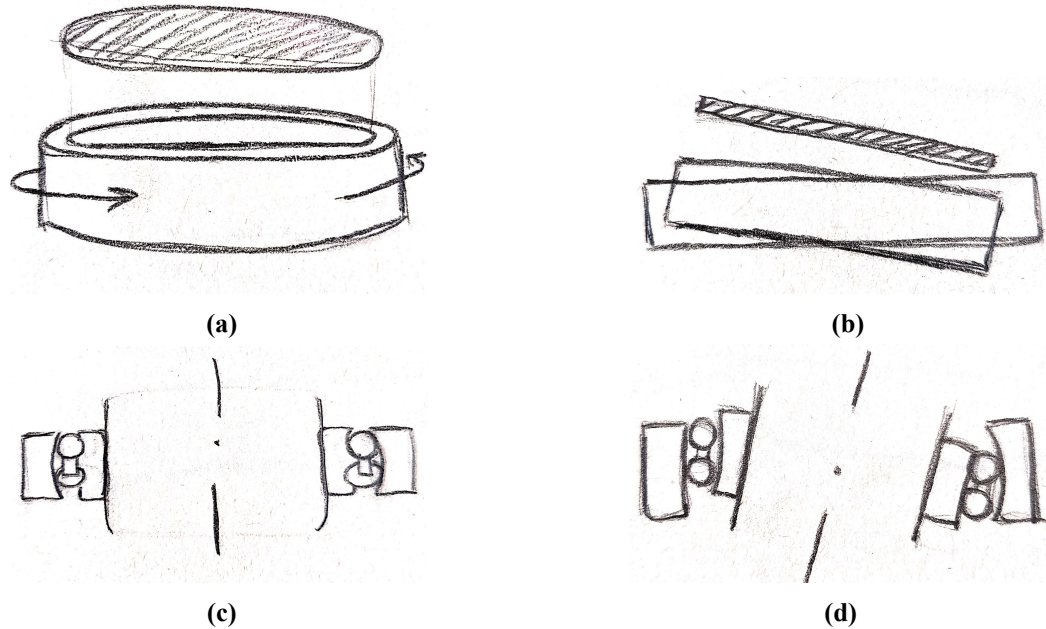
a) Exploded view of the push top and the rotating part. b) Exploded view of the push top and a self aligning bearing inside of the rotating part. c) Self aligning bearing. d) Misalignment within a self aligning bearing.
